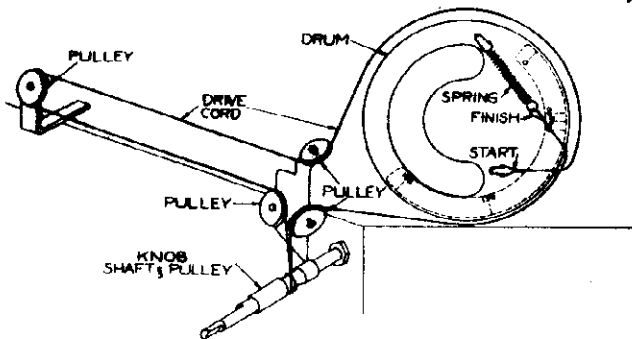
CONDENSER AND INDICATOR DRIVE COND
